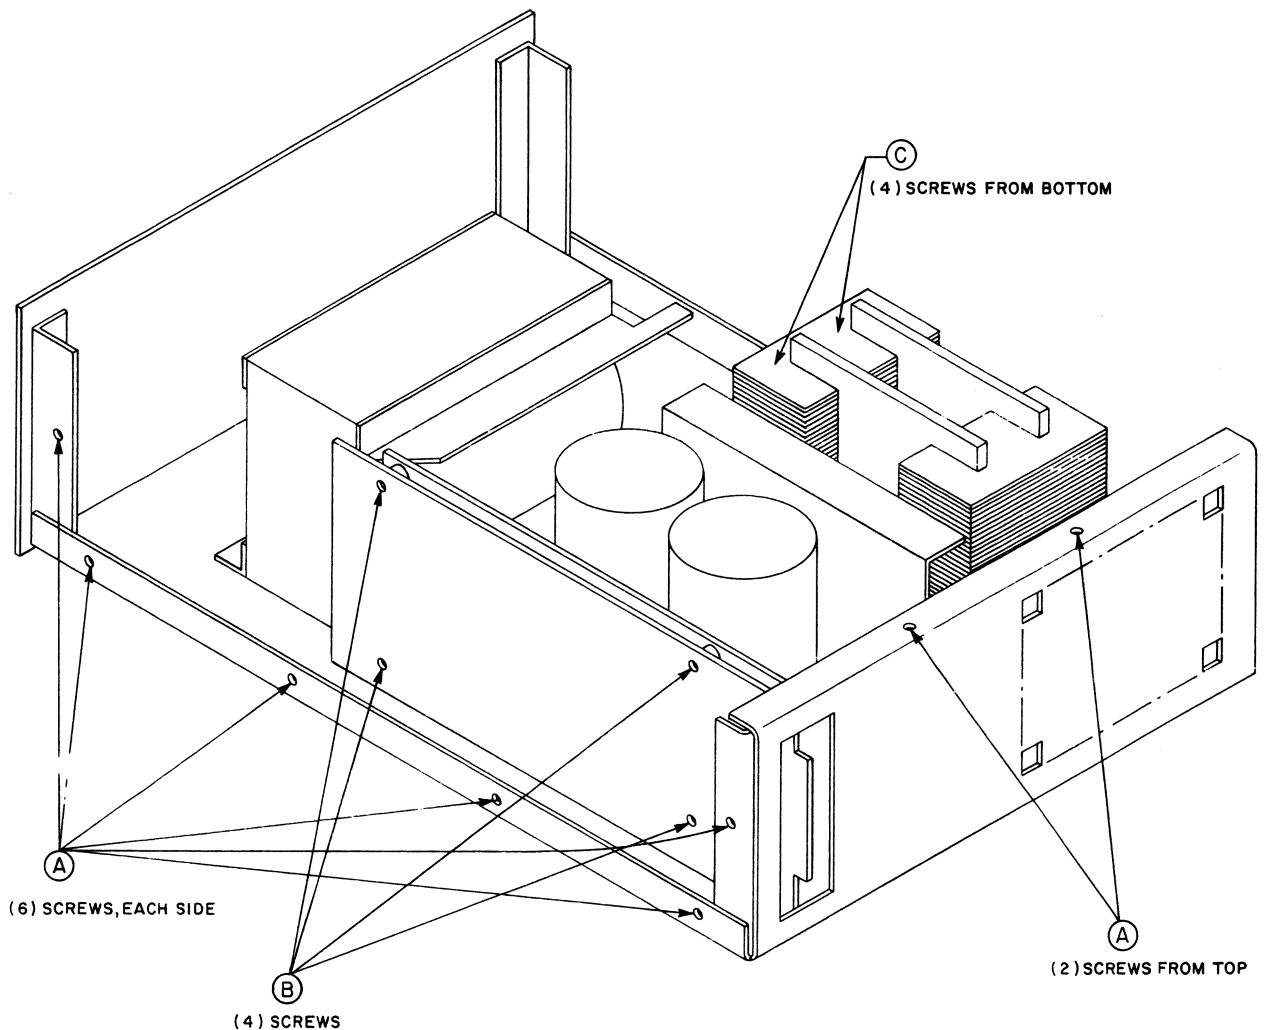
DISASSEMBLY, ATE 3/4 RACK GROUP.
